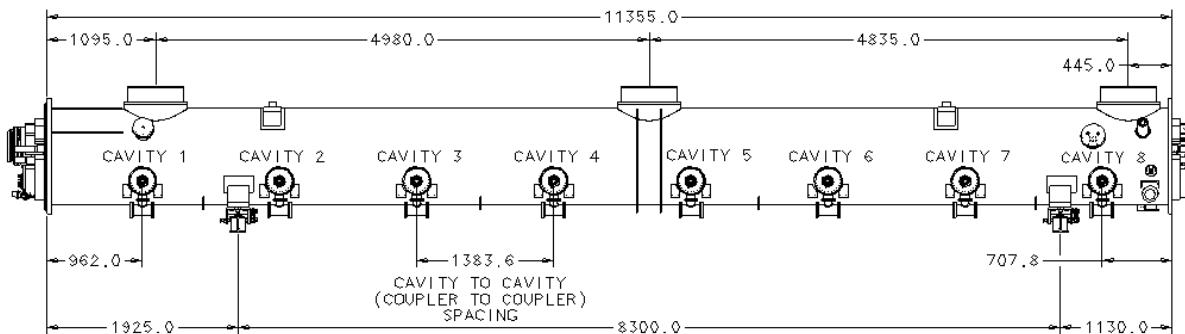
Type 3+ Cryomodule, CM2. Major dimensions.
